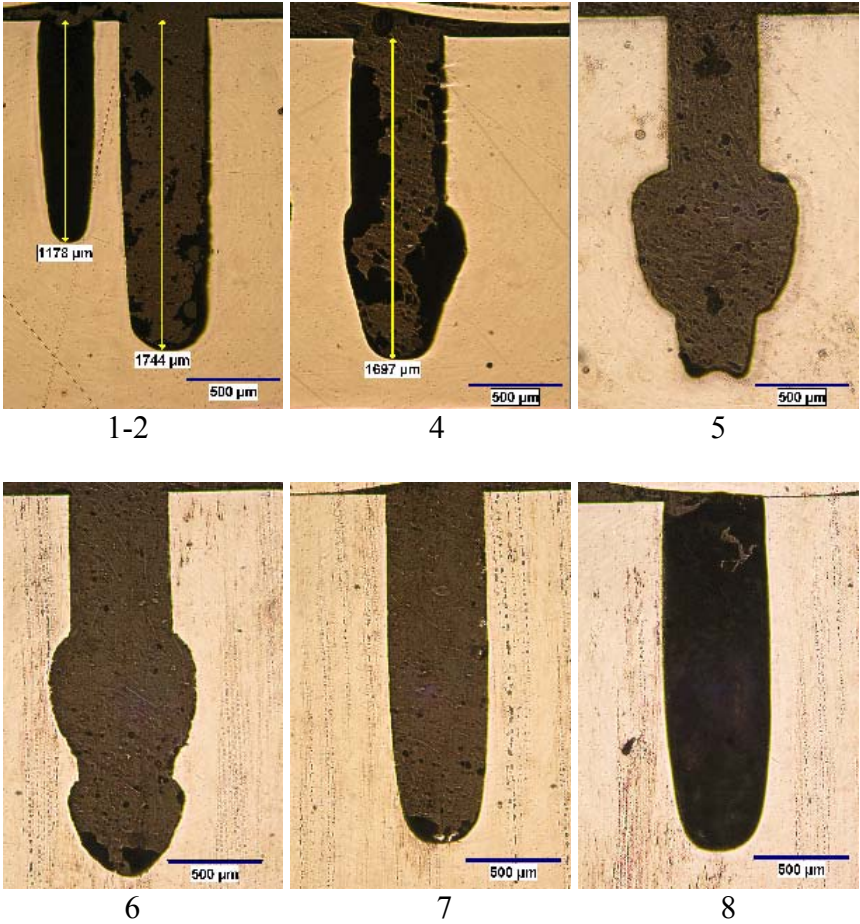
Cross-sectional views of defective and smooth machined holes
